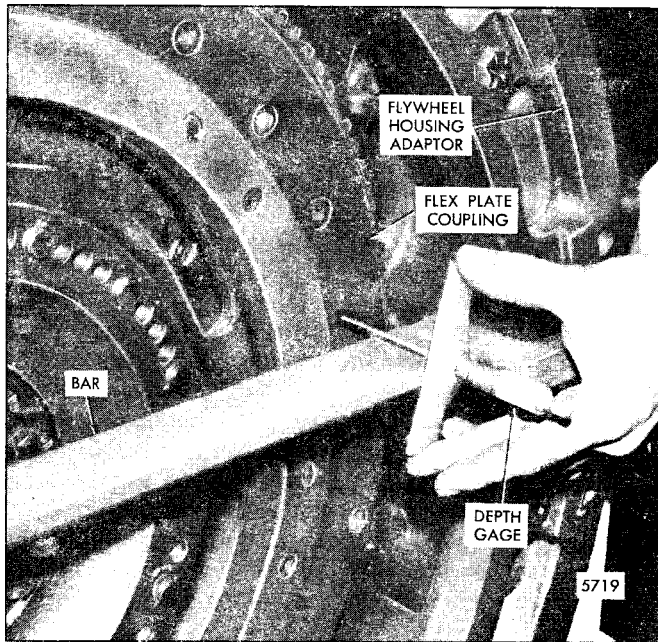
Measuring Distance from Flywheel Housing Adaptor to Engine Flex Plate Coupling
